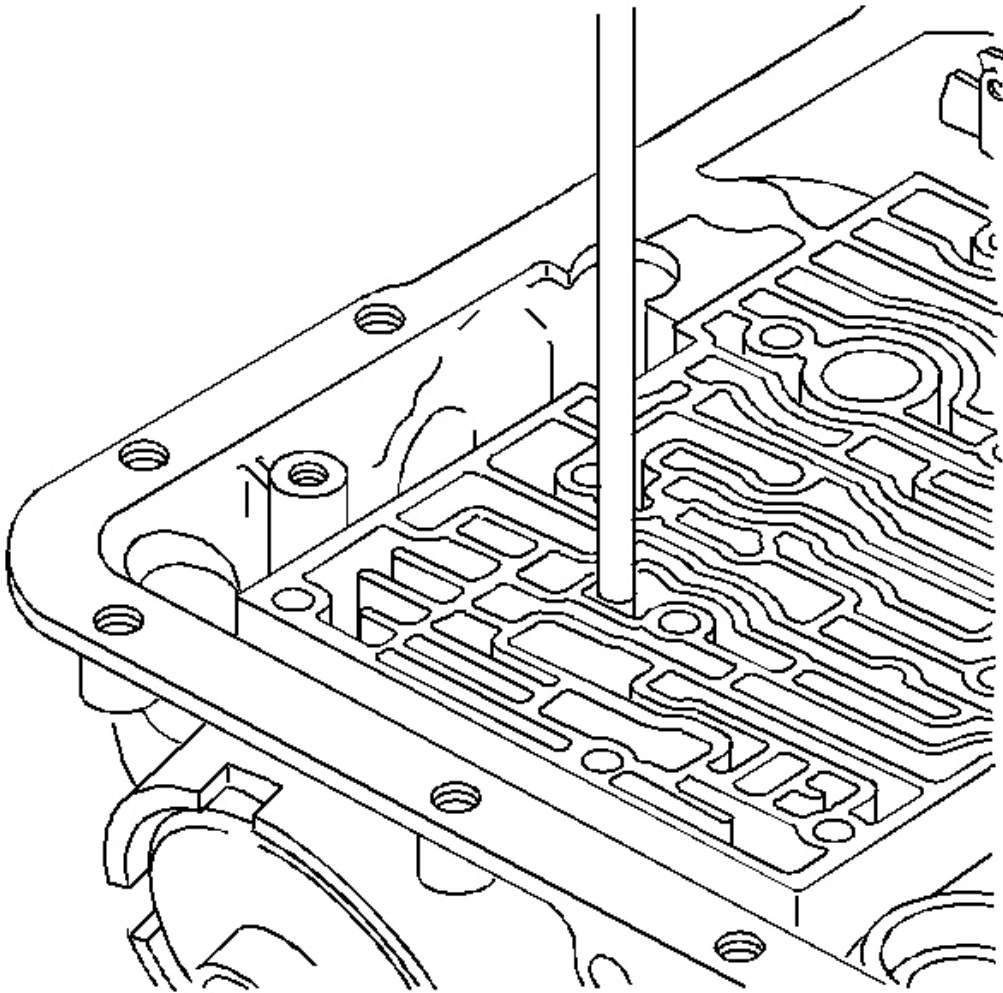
Checking Third Accumulator Retainer And Ball Assembly Alignment
